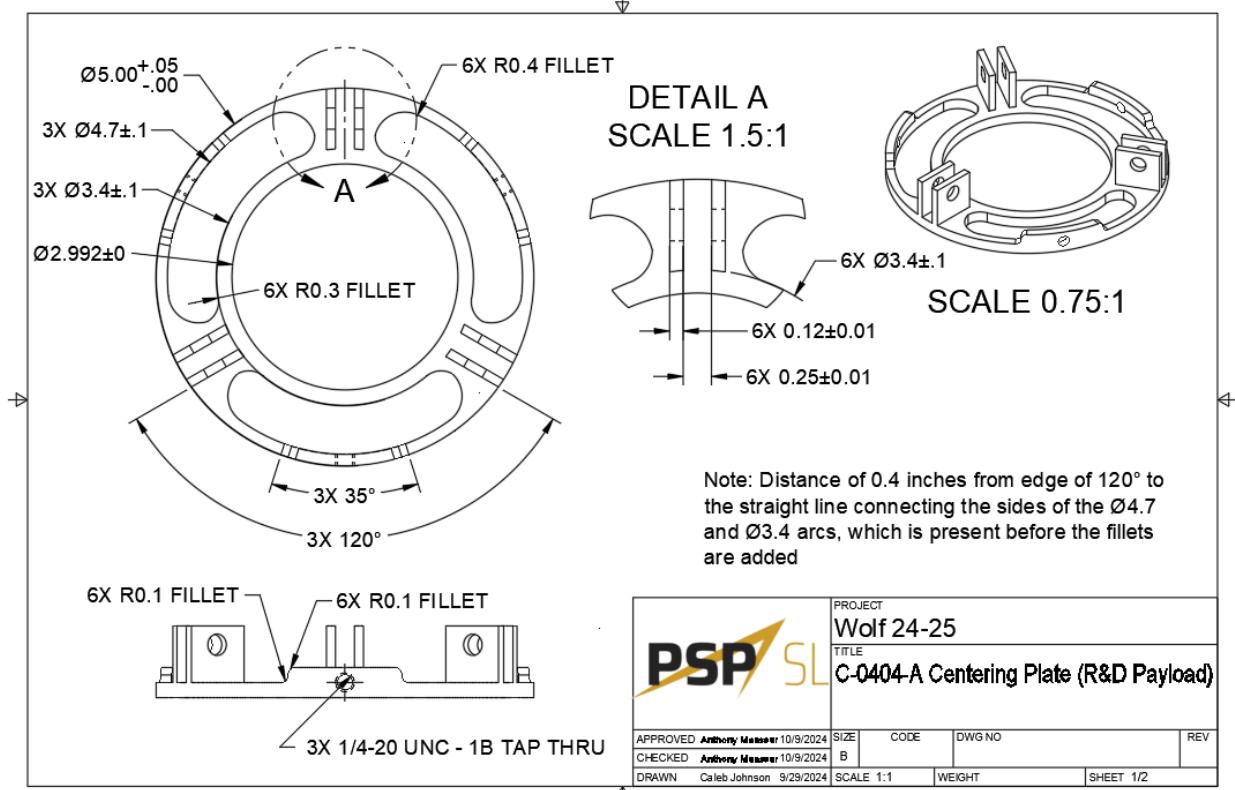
Centering Plate Technical Drawing (Sheet 1)
